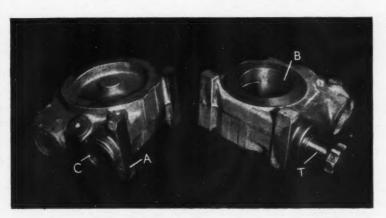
A main pump body is seen at the right, with a locating plug in position, before the milling operation on the feet. At the left is seen a milled casting
